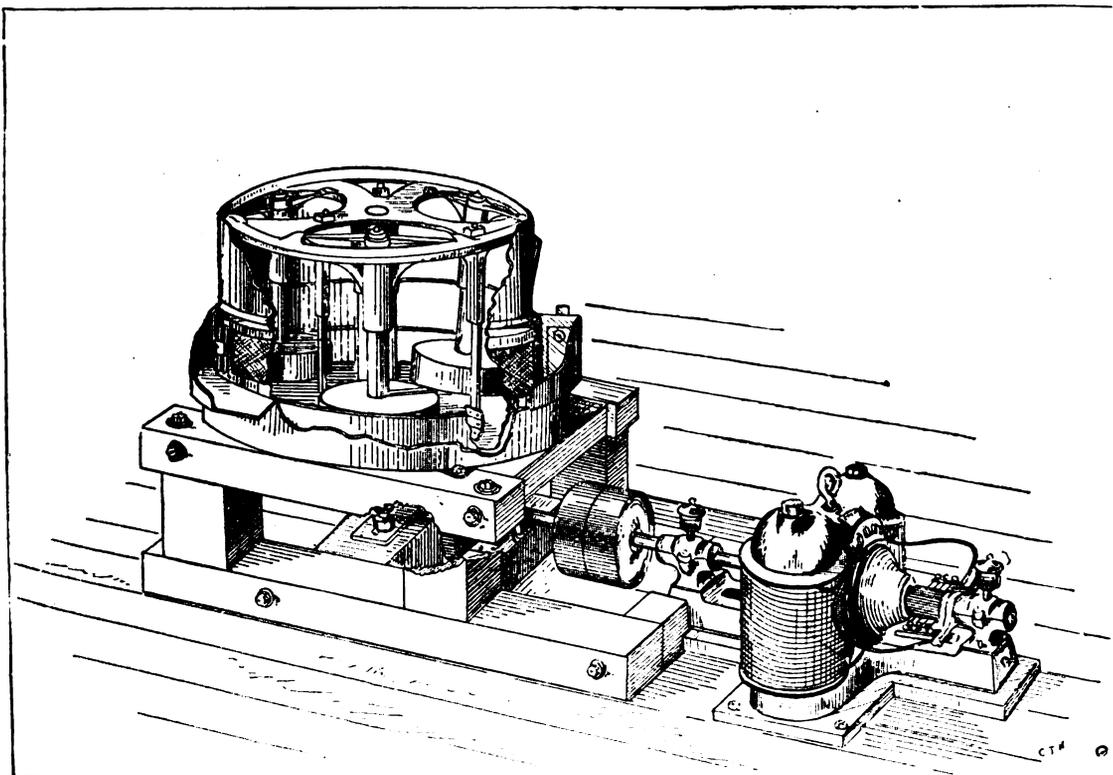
CENTRIFUGAL ROLLER OPERATED BY SPRAGUE MOTOR.
